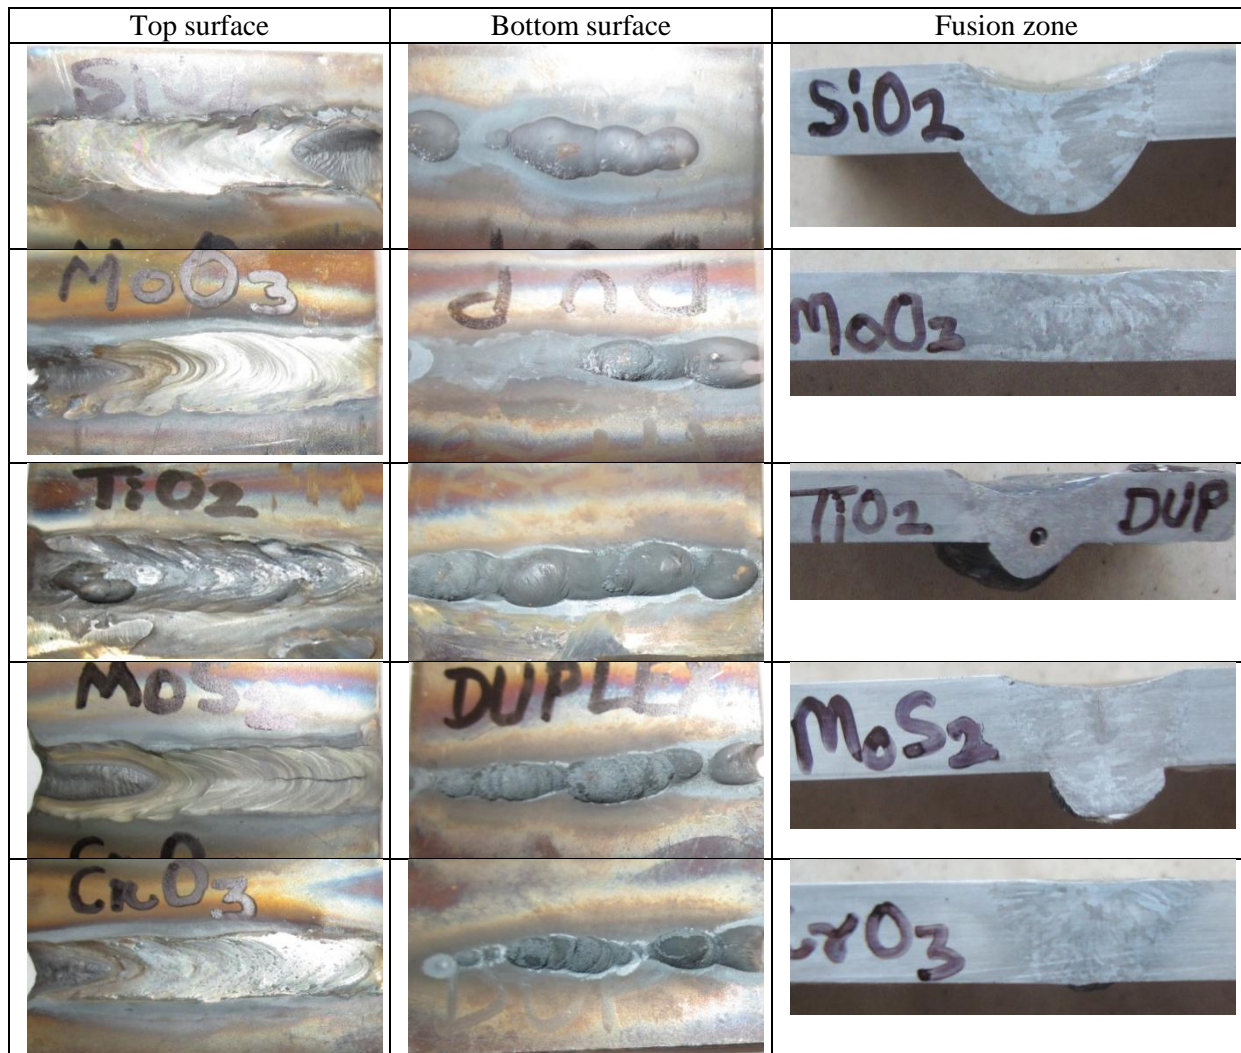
Weld bead appearance (top, bottom surface) and photographic view of the fusion zone after ATIG with five different fluxes for Duplex 2205 workpiece(125 A, Ar + 5% H_2 , flow rate 10 L/min)
